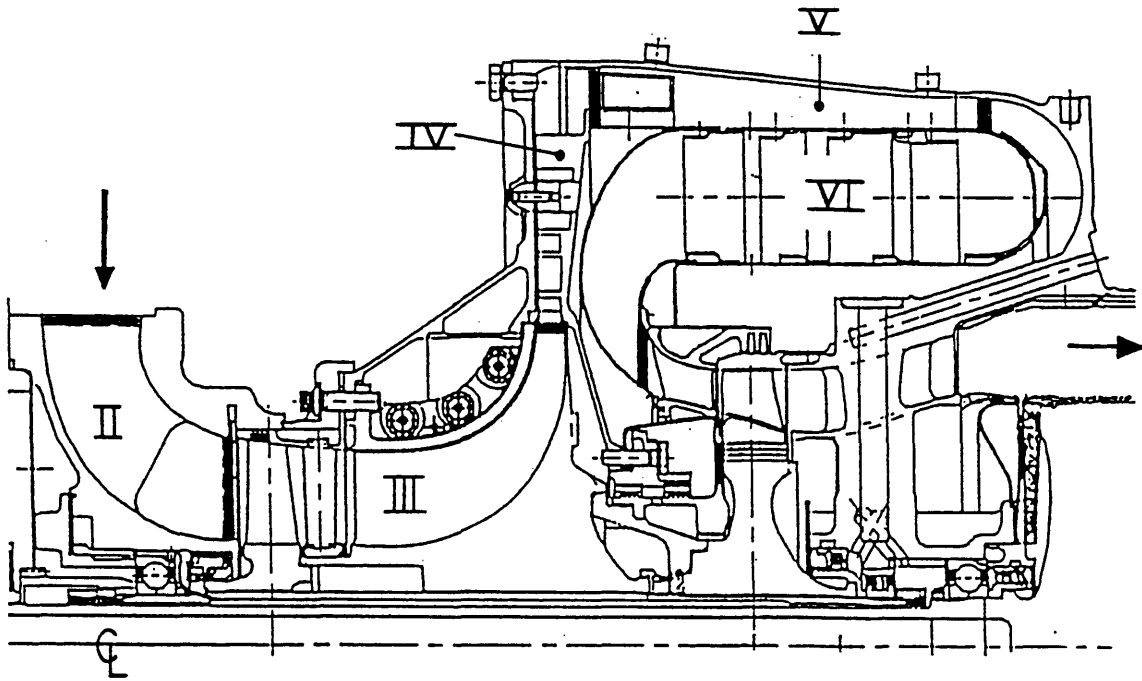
Cross-Section of Lycoming LTS-101 Helicopter Engine.
